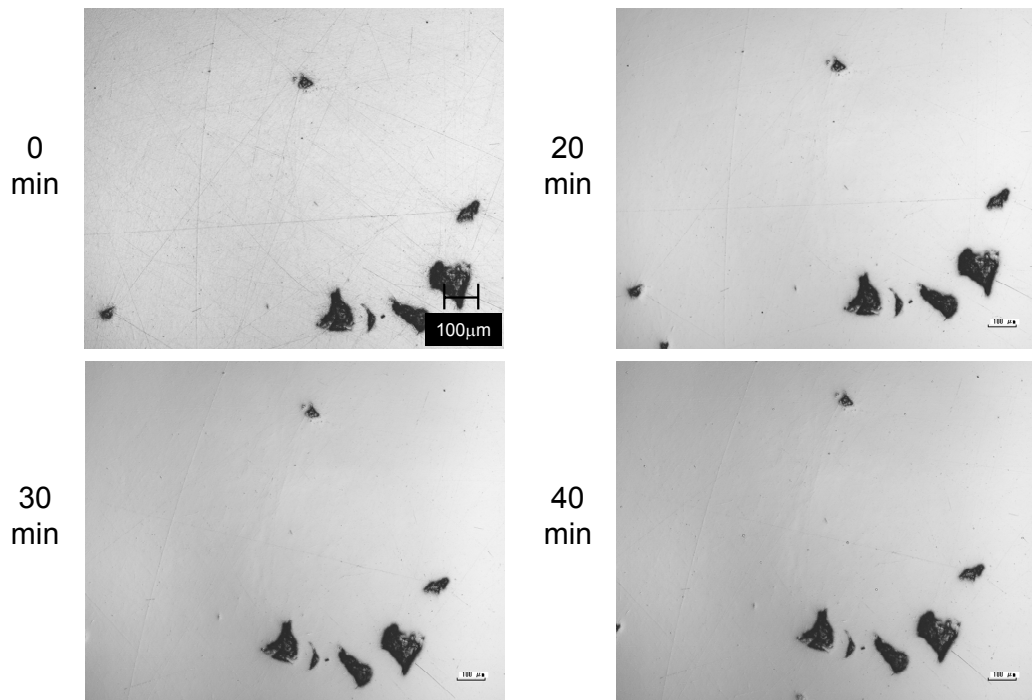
Surface of workpiece at the center part ( # 4000 )
